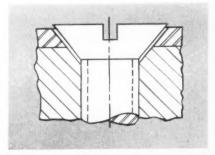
The final assembly may appear as shown here, where the screw has not been threaded with perfect threads up to the head.
